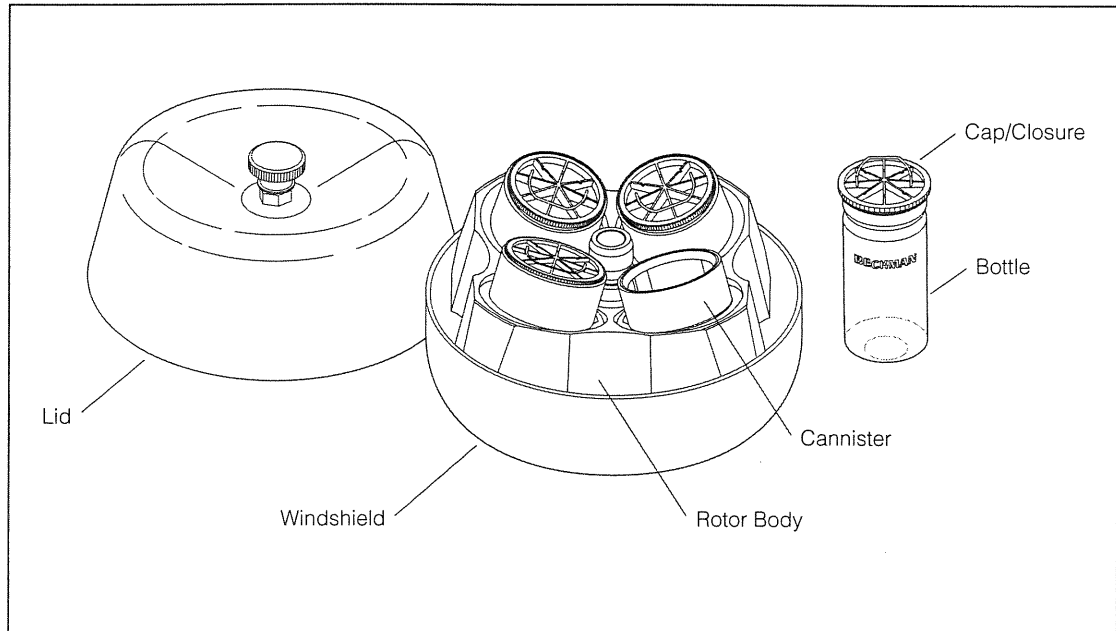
The JLA-9.1000 Fixed Angle Rotor
